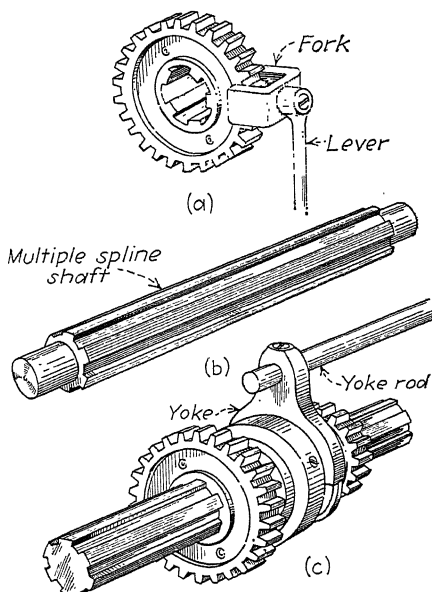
(a) Multiple spline gear and fork for moving gear. (b) Multiple spline shaft sometimes called integral key shaft. (c) Yoke for moving gear.
